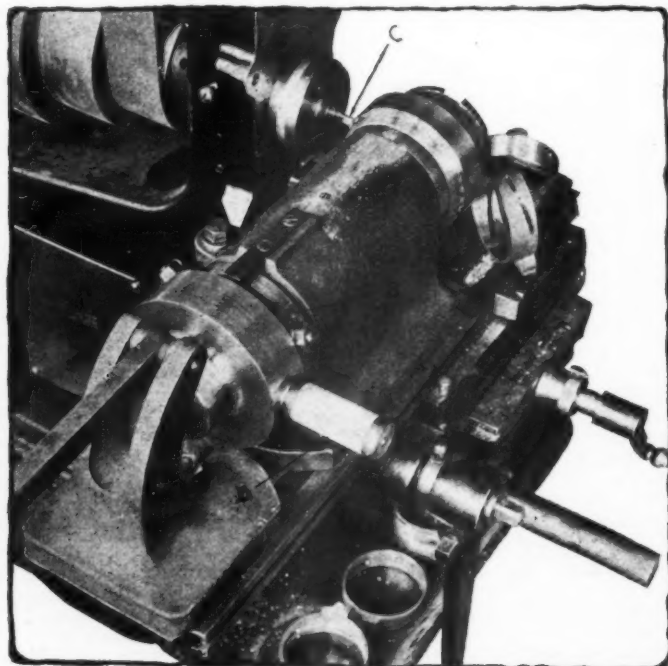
View of slotting tool especially designed for the New-Miller carbureter
